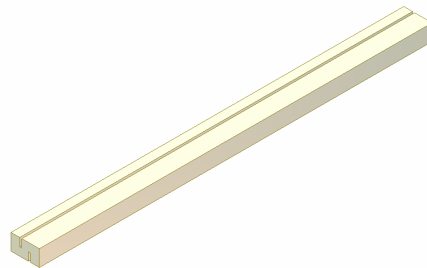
Shear Specimen Preparation – Strip Machined from Panel
